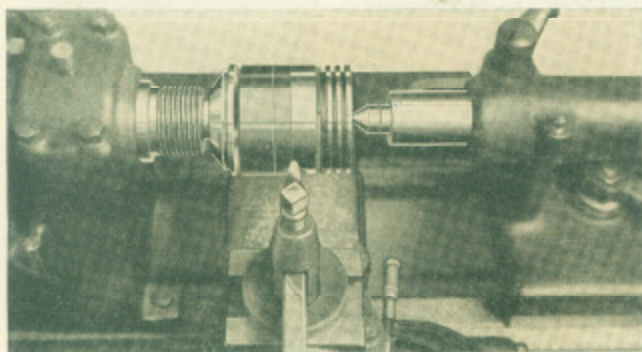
Taking a Finishing Cut on a Semi-machined Piston
